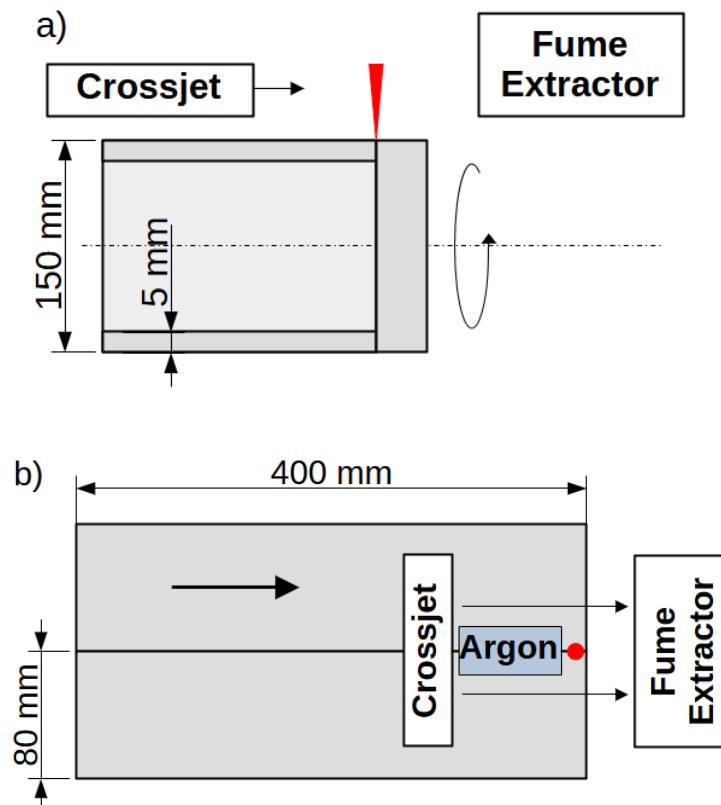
Weld Configuration – a) AlSi10Mg Tube / 5 mm & b) S355J2+N Plate / 6 mm.
